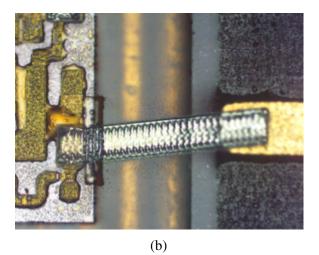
Further examples of flat interconnects that were able to be deposited on an HPA attached with AJP die attach.
